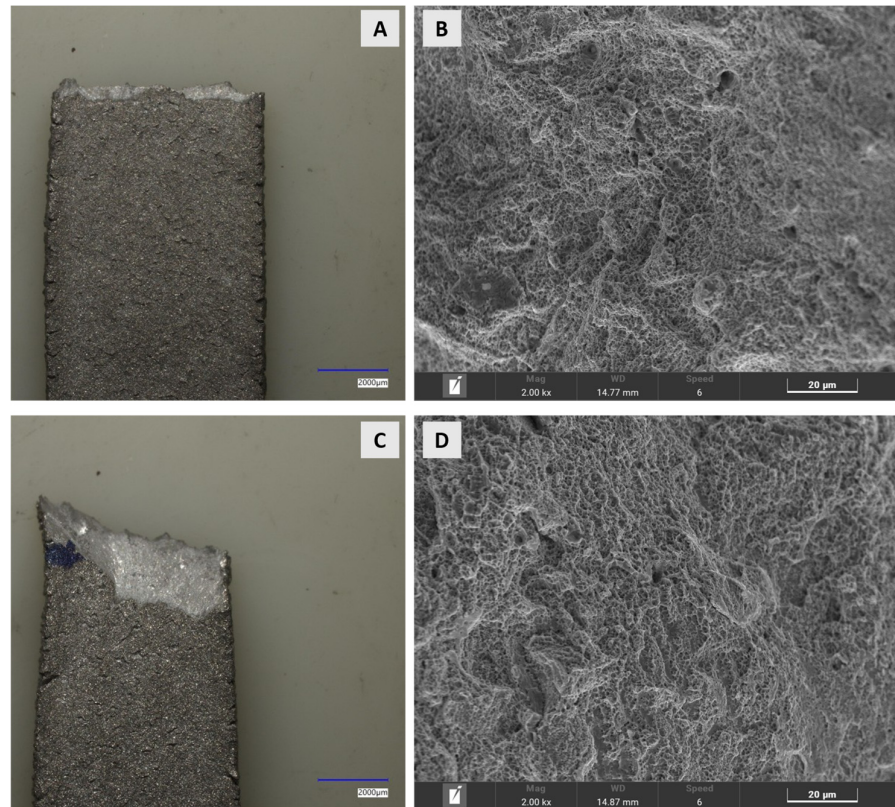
Fracture surfaces of the specimens: optical overview of surface fracture on the left and SEM micrographic analysis on the right. Images (A,B) are referred to as specimen #13 (thickness 40%), and images (C,D) are referred to as specimen #3 (thickness 100%).
